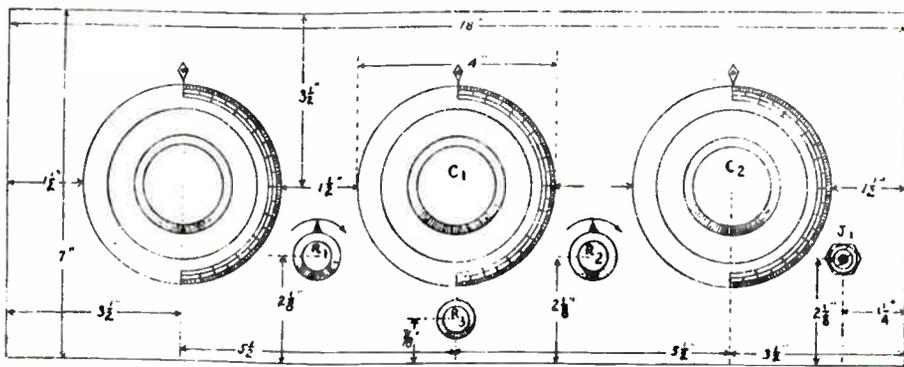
, the panel layout (above) and Fig. 3, the assembly plan.
